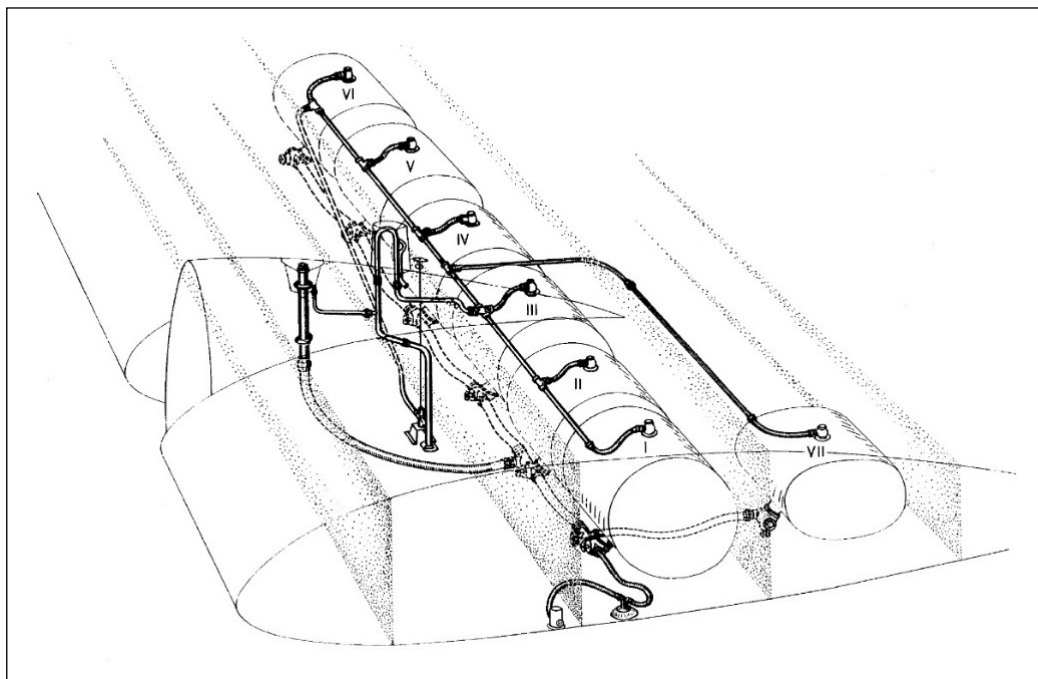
Fuel cell assembly in the right-hand outer wing. Source: Ju-Air AFM from 2017.
